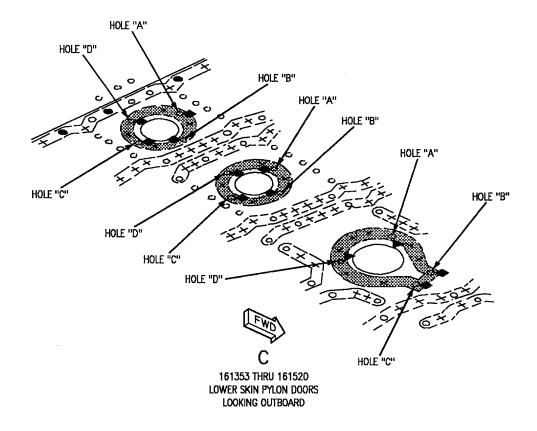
Lower Skin Channel Groove Seal Injection (Sheet 5)
